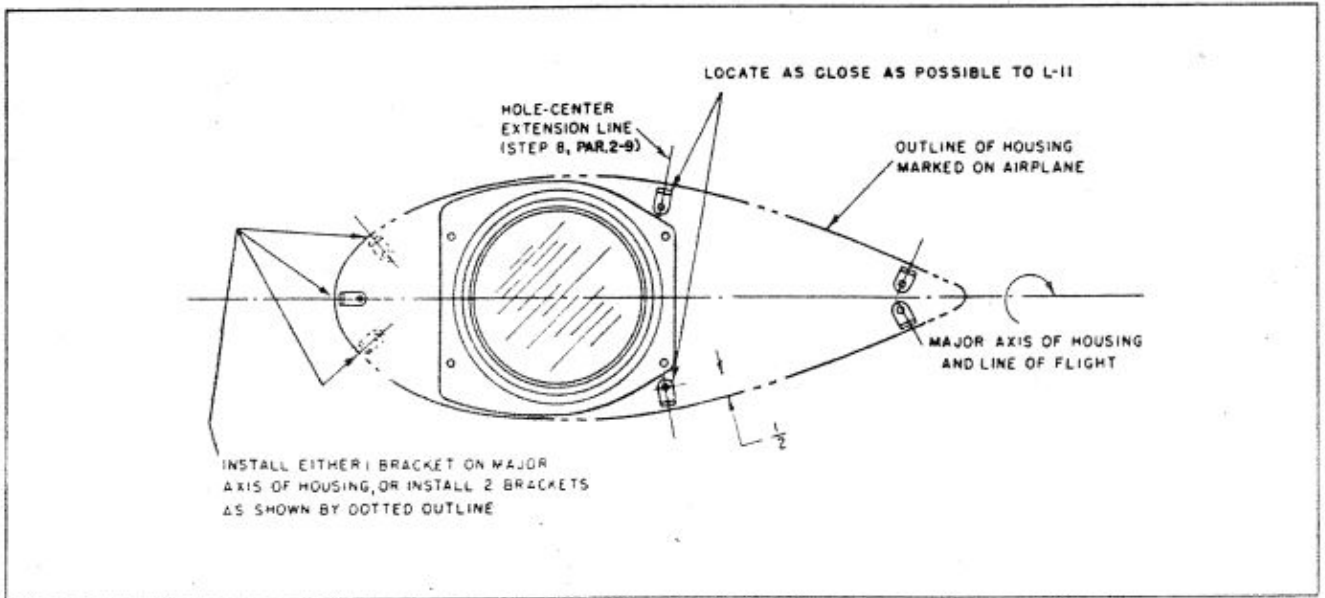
Location of Mounting Brackets for Housing ARC-17764
